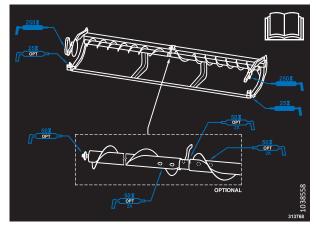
Decal for Single-Knife Header with Two-Piece Upper Cross Auger
